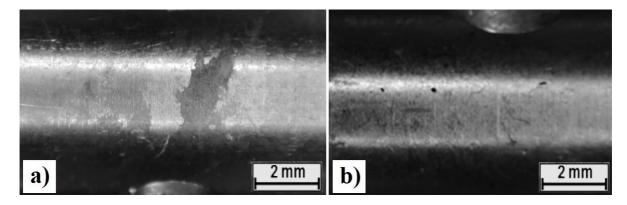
Examples of surface of the turbocharger slide bearing: a) dry friction and b) lubricated with 5W-30 (overworked oil)
